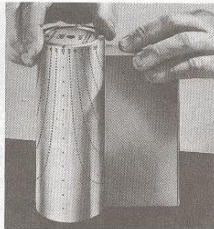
A direct-reading cylindrical square being used to check a part for squareness.
